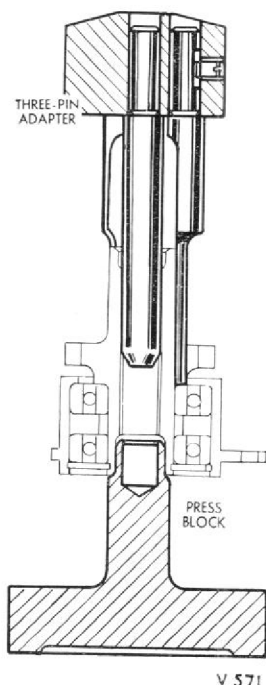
Three-pin adapter T.77749 and press block T.77750 for removing bearing housing from port hydraulic pump.
